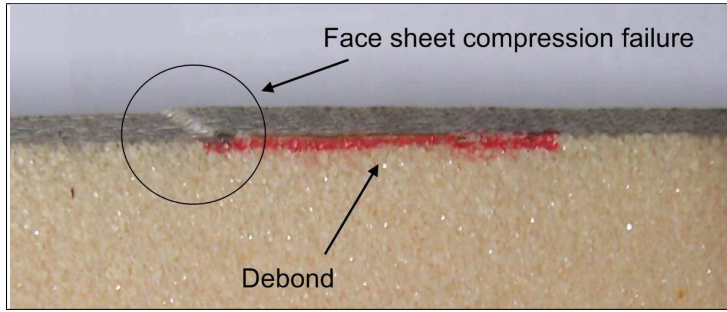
Face compression failure in a column specimen with H200 core and 25.4 mm debond.
